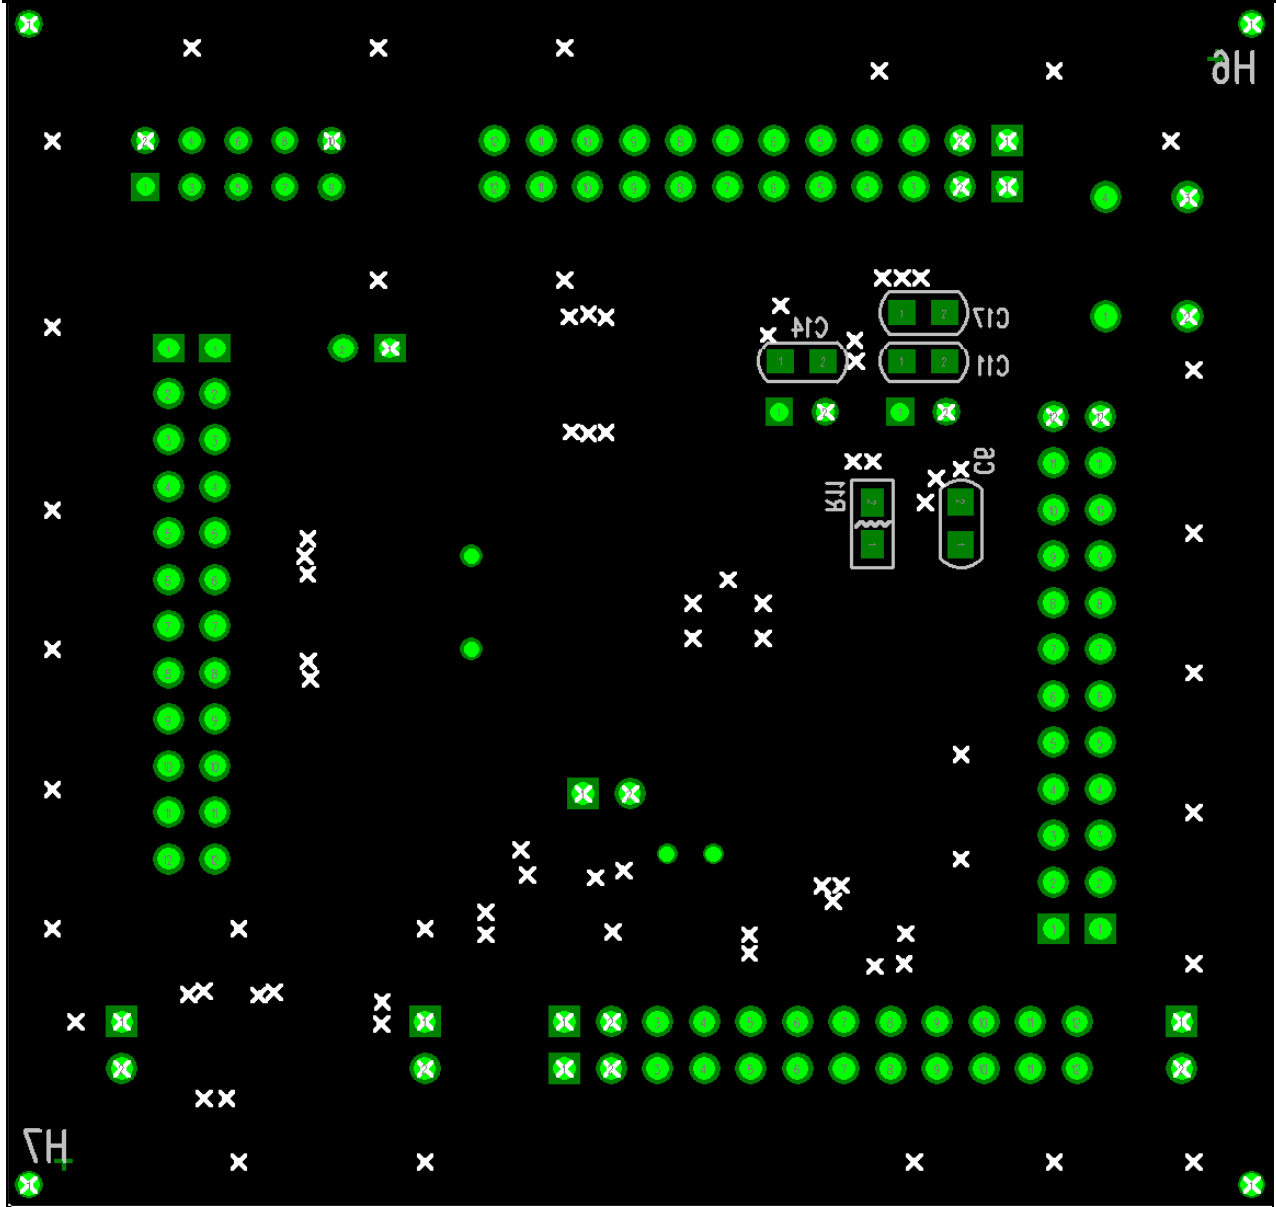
IS31CS8968A Evaluation Board Component Placement Guide - Bottom Layer
